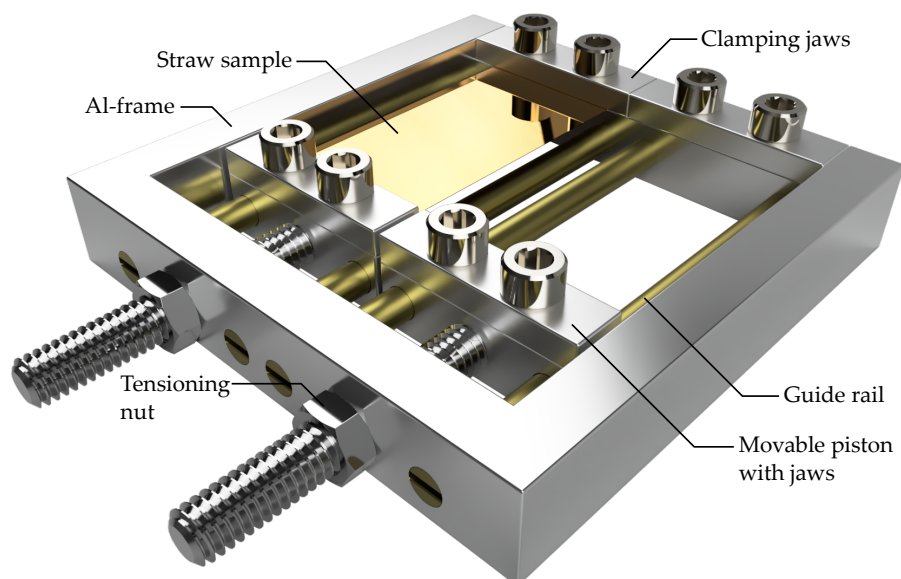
The first version of the tensioning device. It consist of an aluminium frame and pistons between which a section of a straw can be clamped in. Using a nut the piston can be moved and the sample elongated. The tensioning device can hold two samples, only one of which is shown.
